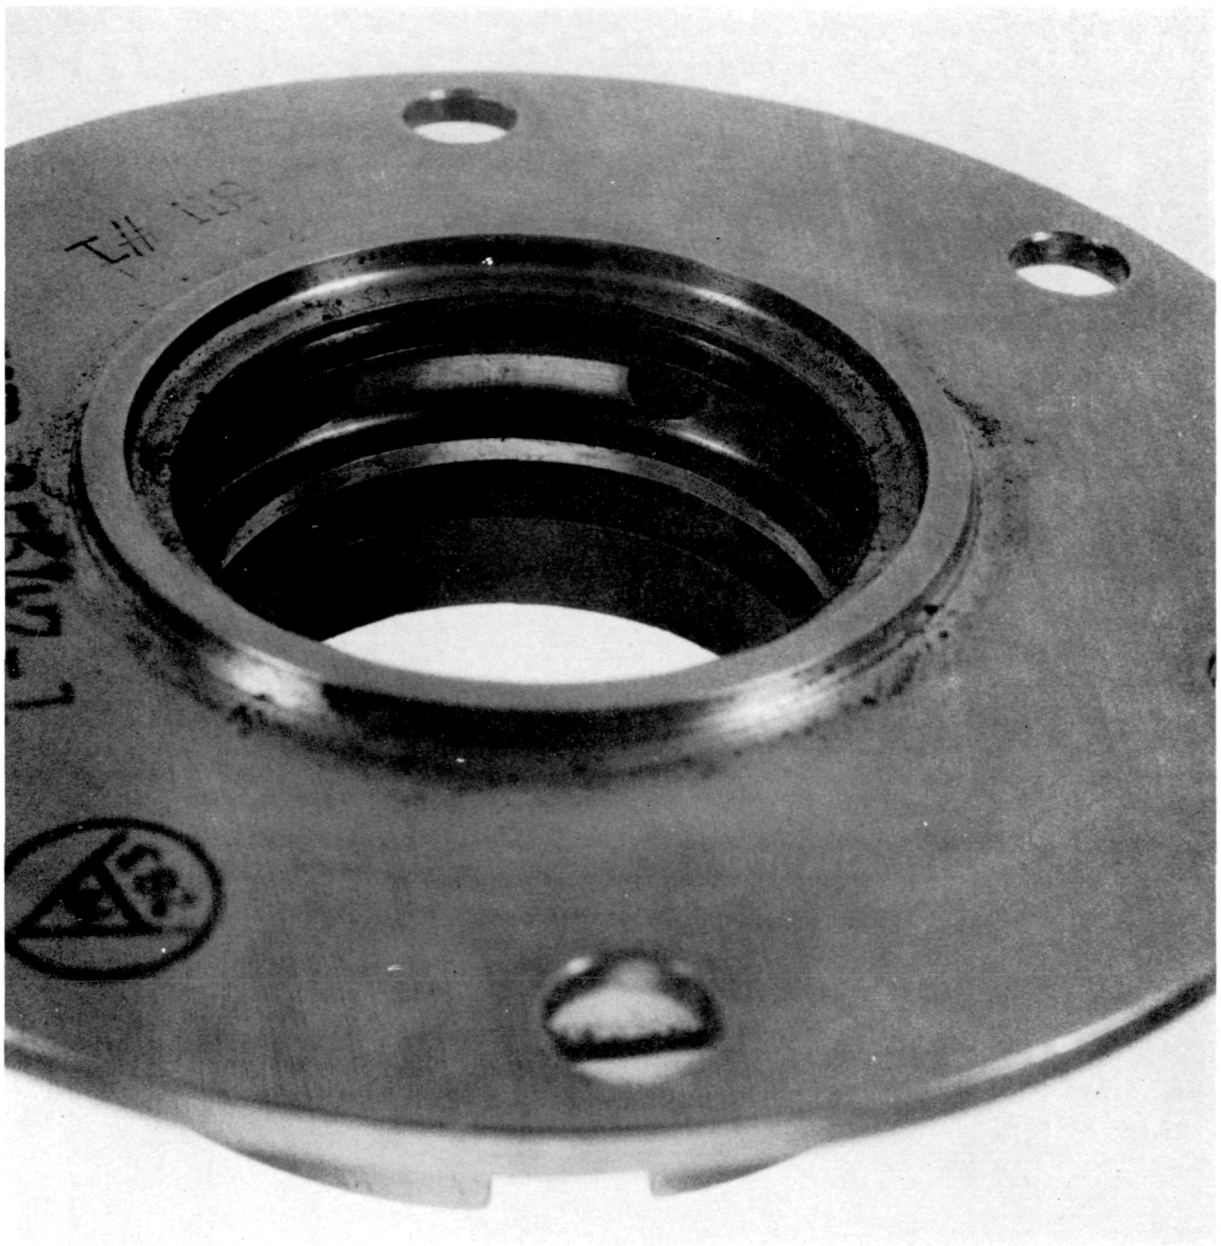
NASA 6:1 Compressor Test Rig, Inducer Failure, Seal Housing SKP25647-1 Knife Edge Wear.
